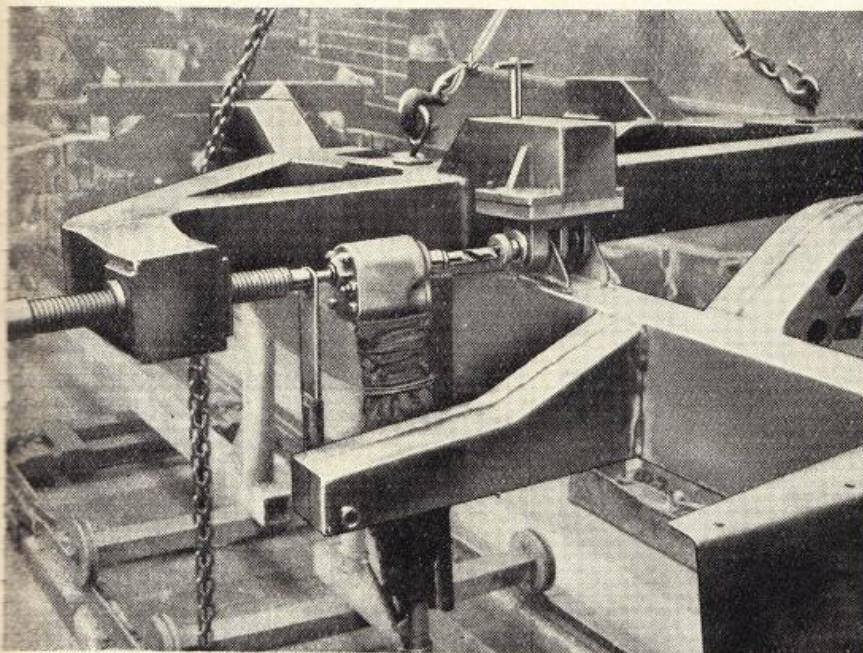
Pneumatic Drill positioned for the Drilling of One of the Spring Mounting Brackets. The Jig is Lowered on to the Chassis Frame from an Overhead Runway
